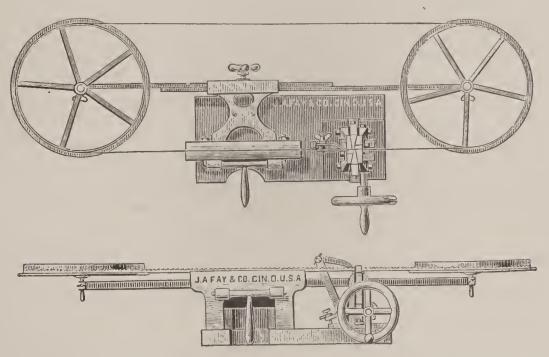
Howe's Band Saw Filing and Setting Machine.
